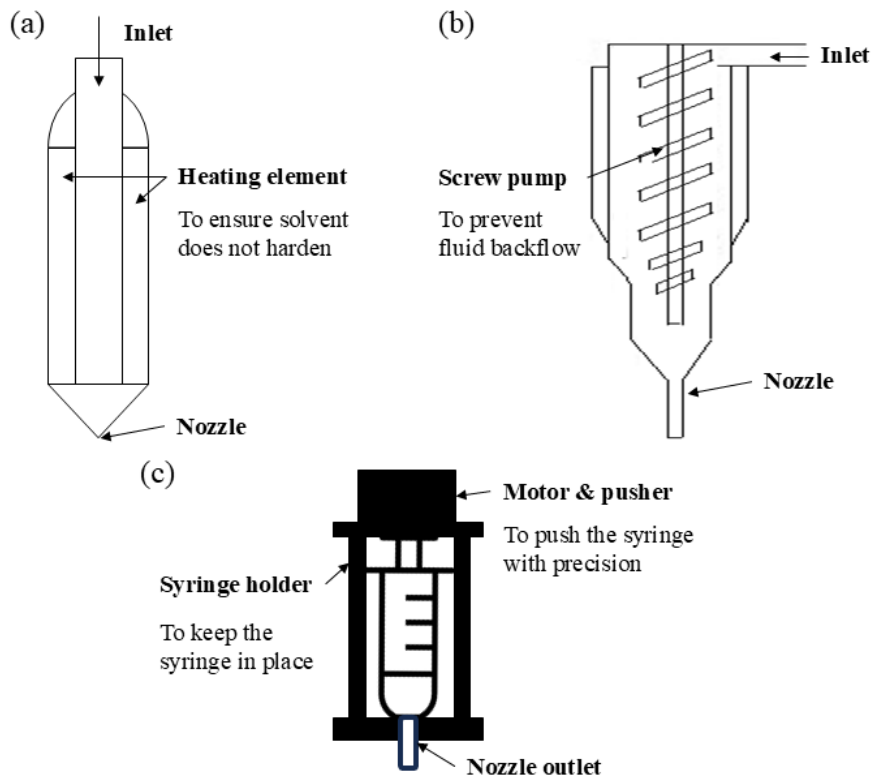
Printing nozzle design concepts: (a) Design 1, (b) Design 2, and (c) Design 3
